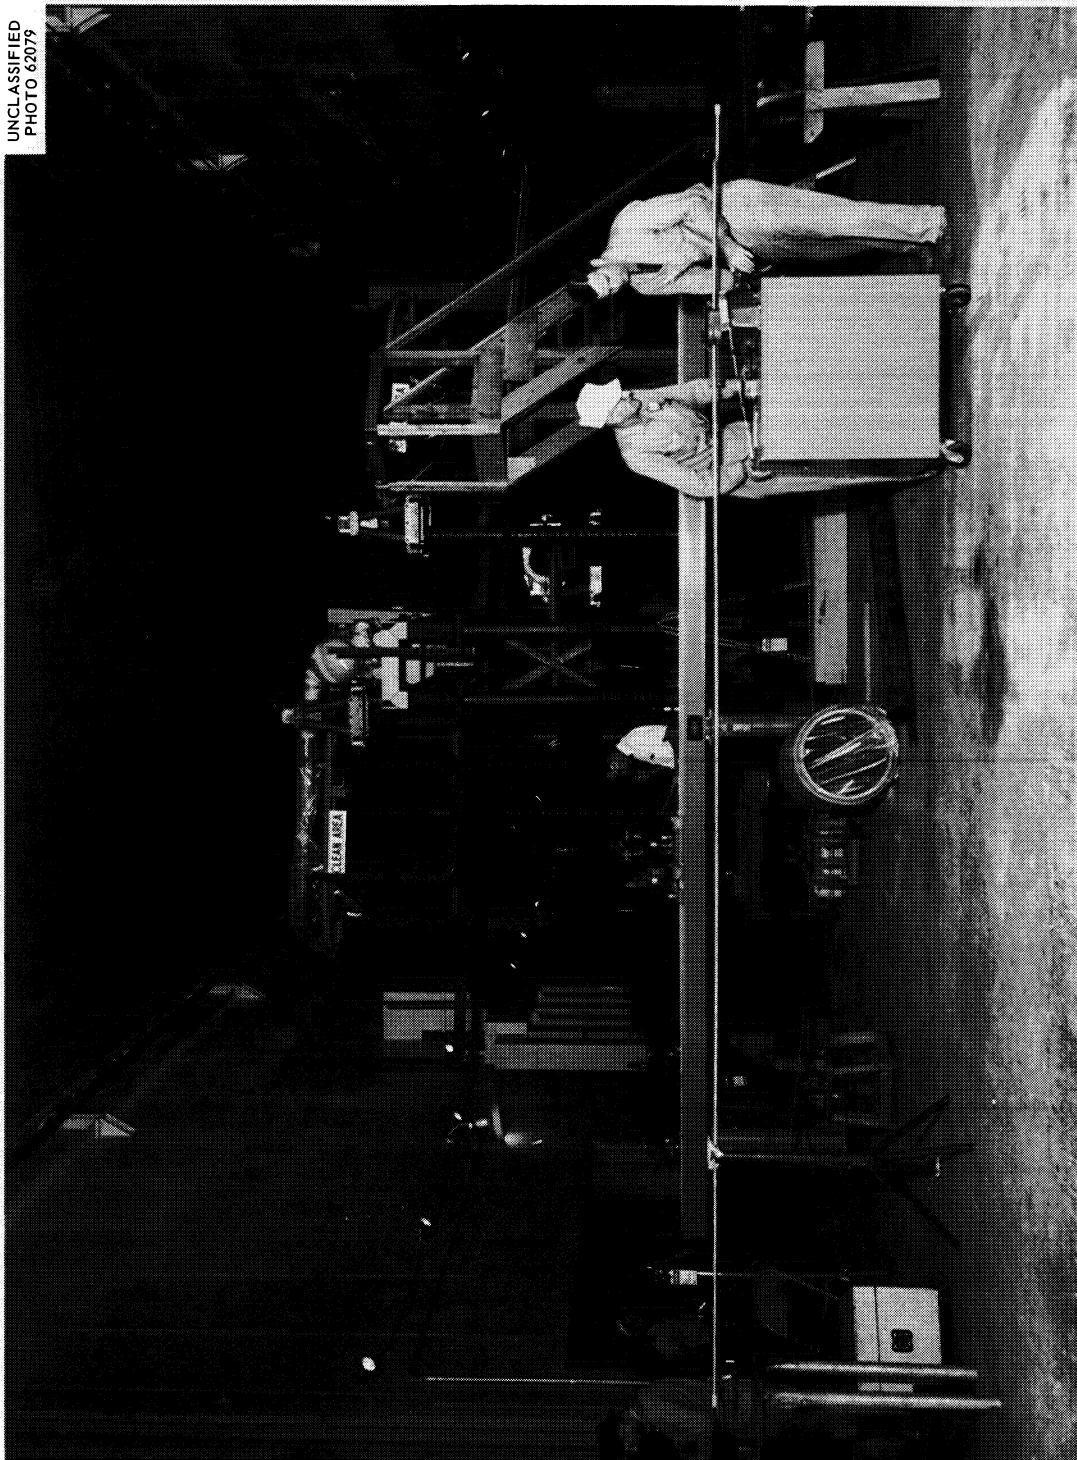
Optical Tooling and Jigging for Accurate Assembly of the MSRE Fuel System.
